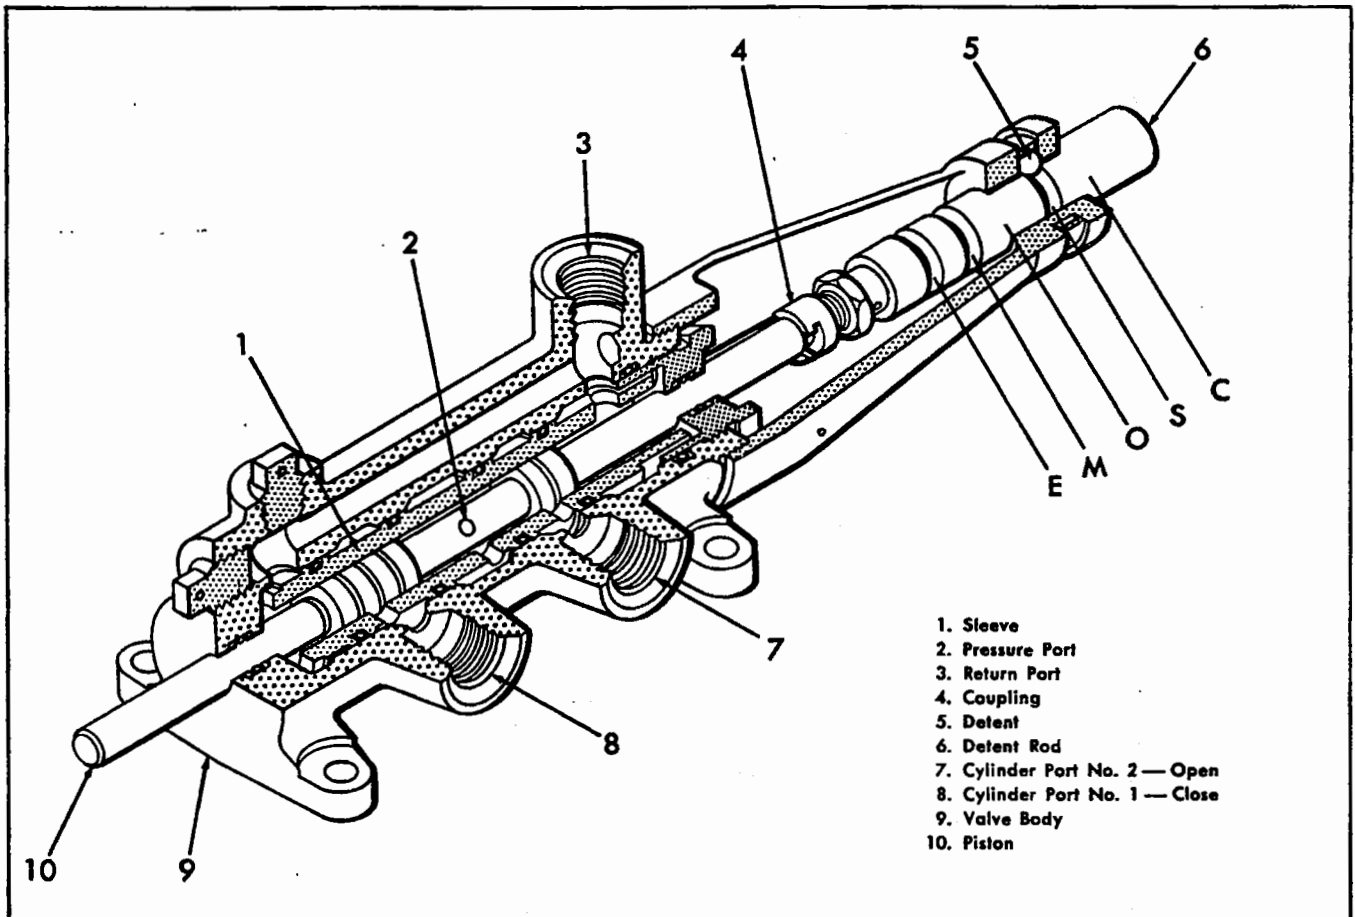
(Sheet 1 of 2 Sheets). Canopy Control Valve.
